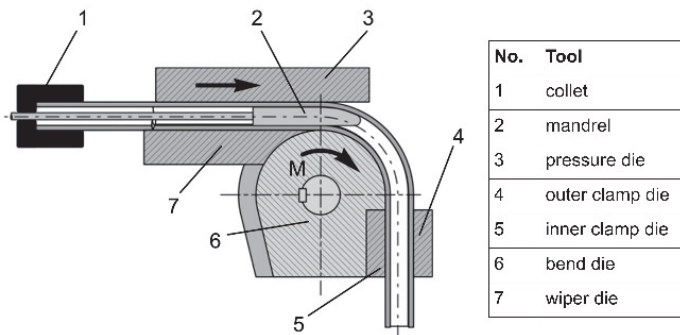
Tool setting of a rotary draw bending process [VDI3430]
